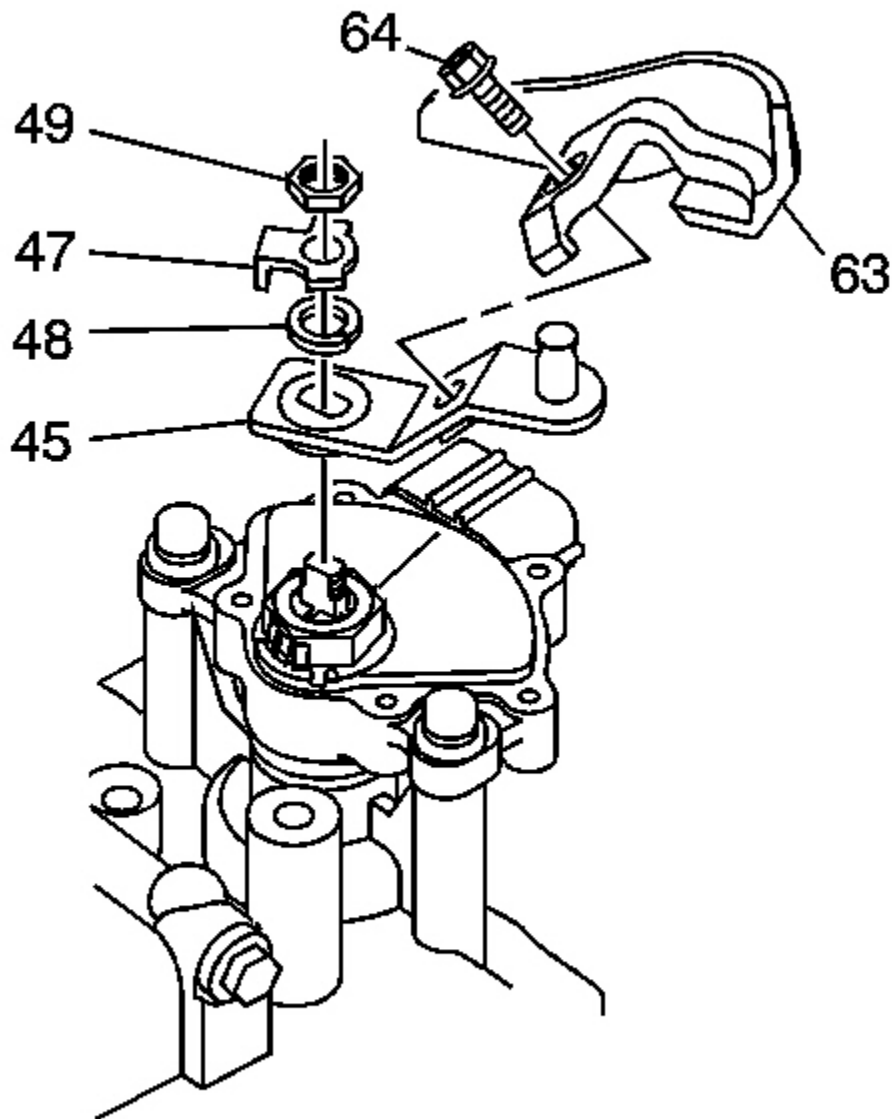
Range Selector Lever, Bolt, Spring Washer, Lock Washer, Nut & Link Cover
